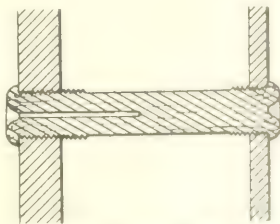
SECTIONAL VIEW OF STAYBOLT WITH TELL TALE HOLE.
